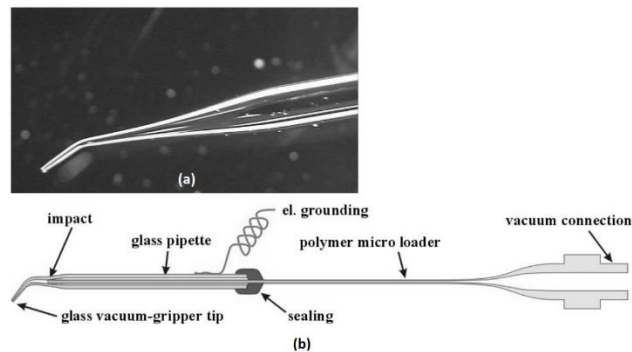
Vacuum gripper (a) optical image after sputtering with gold (b) Cross-section [58]
